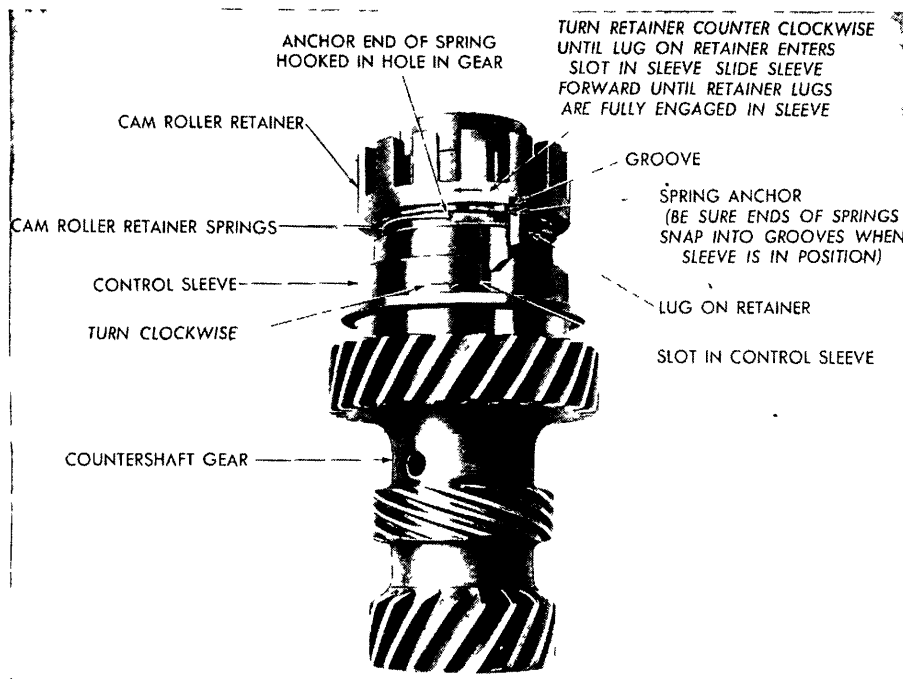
Installing free wheeling cam roller springs. 1946-52 automatic transmission
